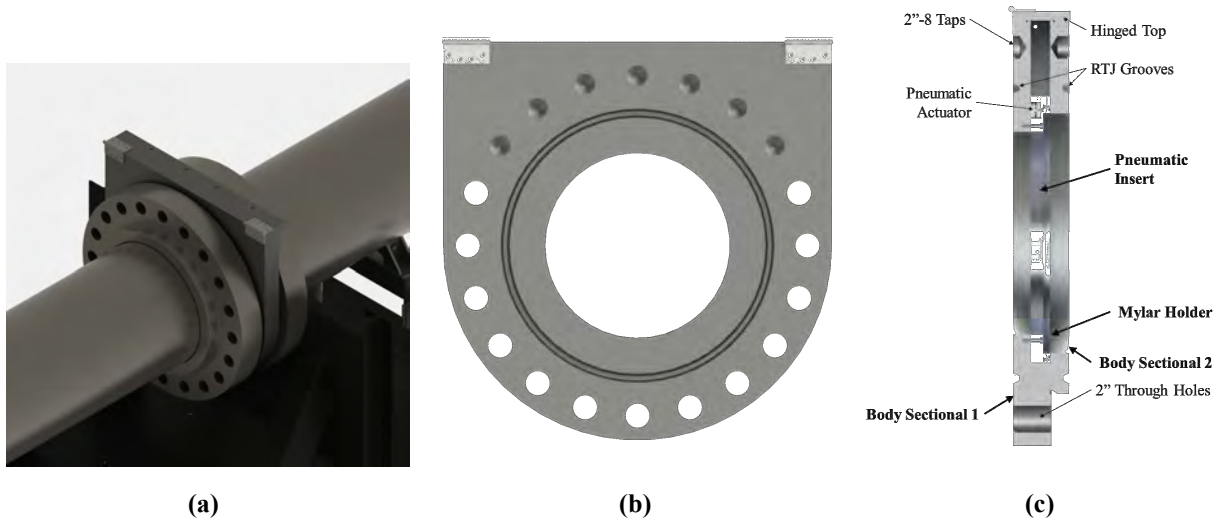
(a) Mylar diaphragm mechanism at the interface between the driven and accelerator sections of HXT. (b) Threaded holes up top and clearance holes around the mid to bottom holes. (c) Design points for the Mylar diaphragm system assembly with major components in bold.
